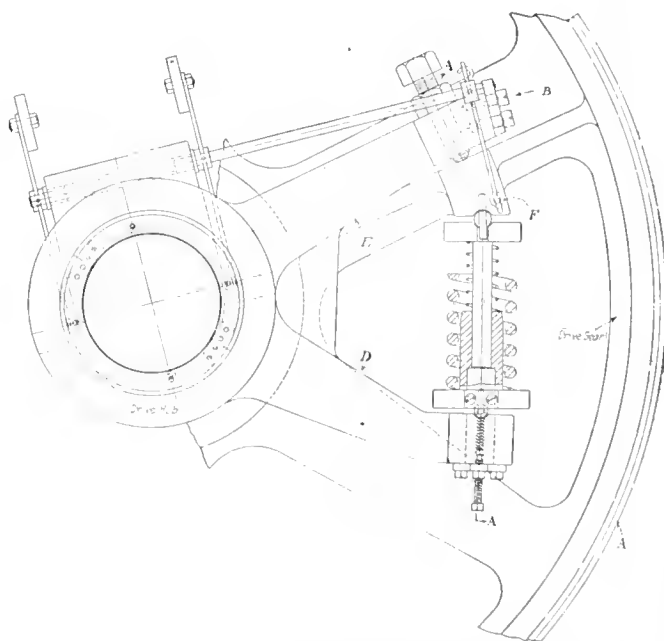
PORTION OF DRIVE GEAR, SHOWING METHOD OF MOUNTING THE COMPRESSION SPRINGS
